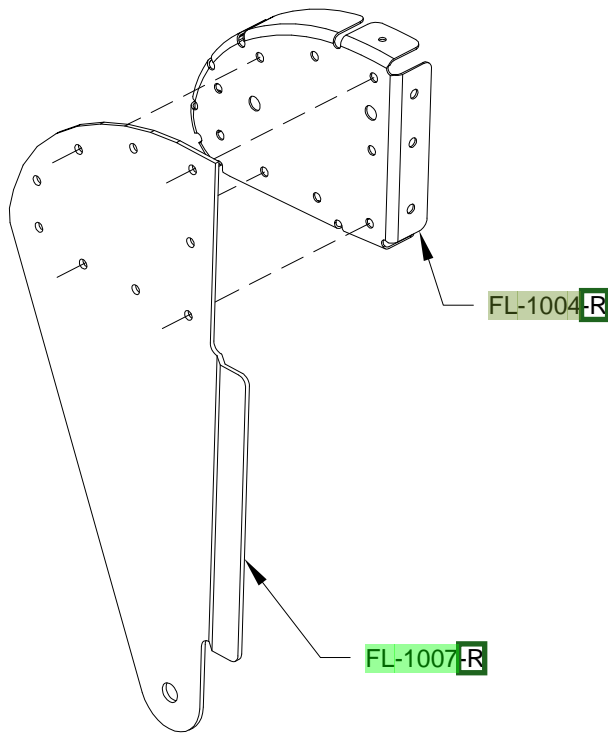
RIGHT HINGE PAIR RIB SUBASSEMBLY
